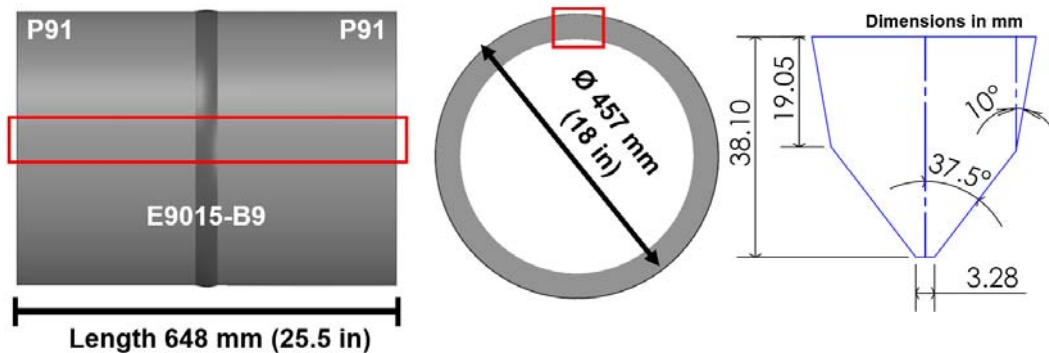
Fabrication and weld profile geometry for damage tolerant heat of Grade 91
